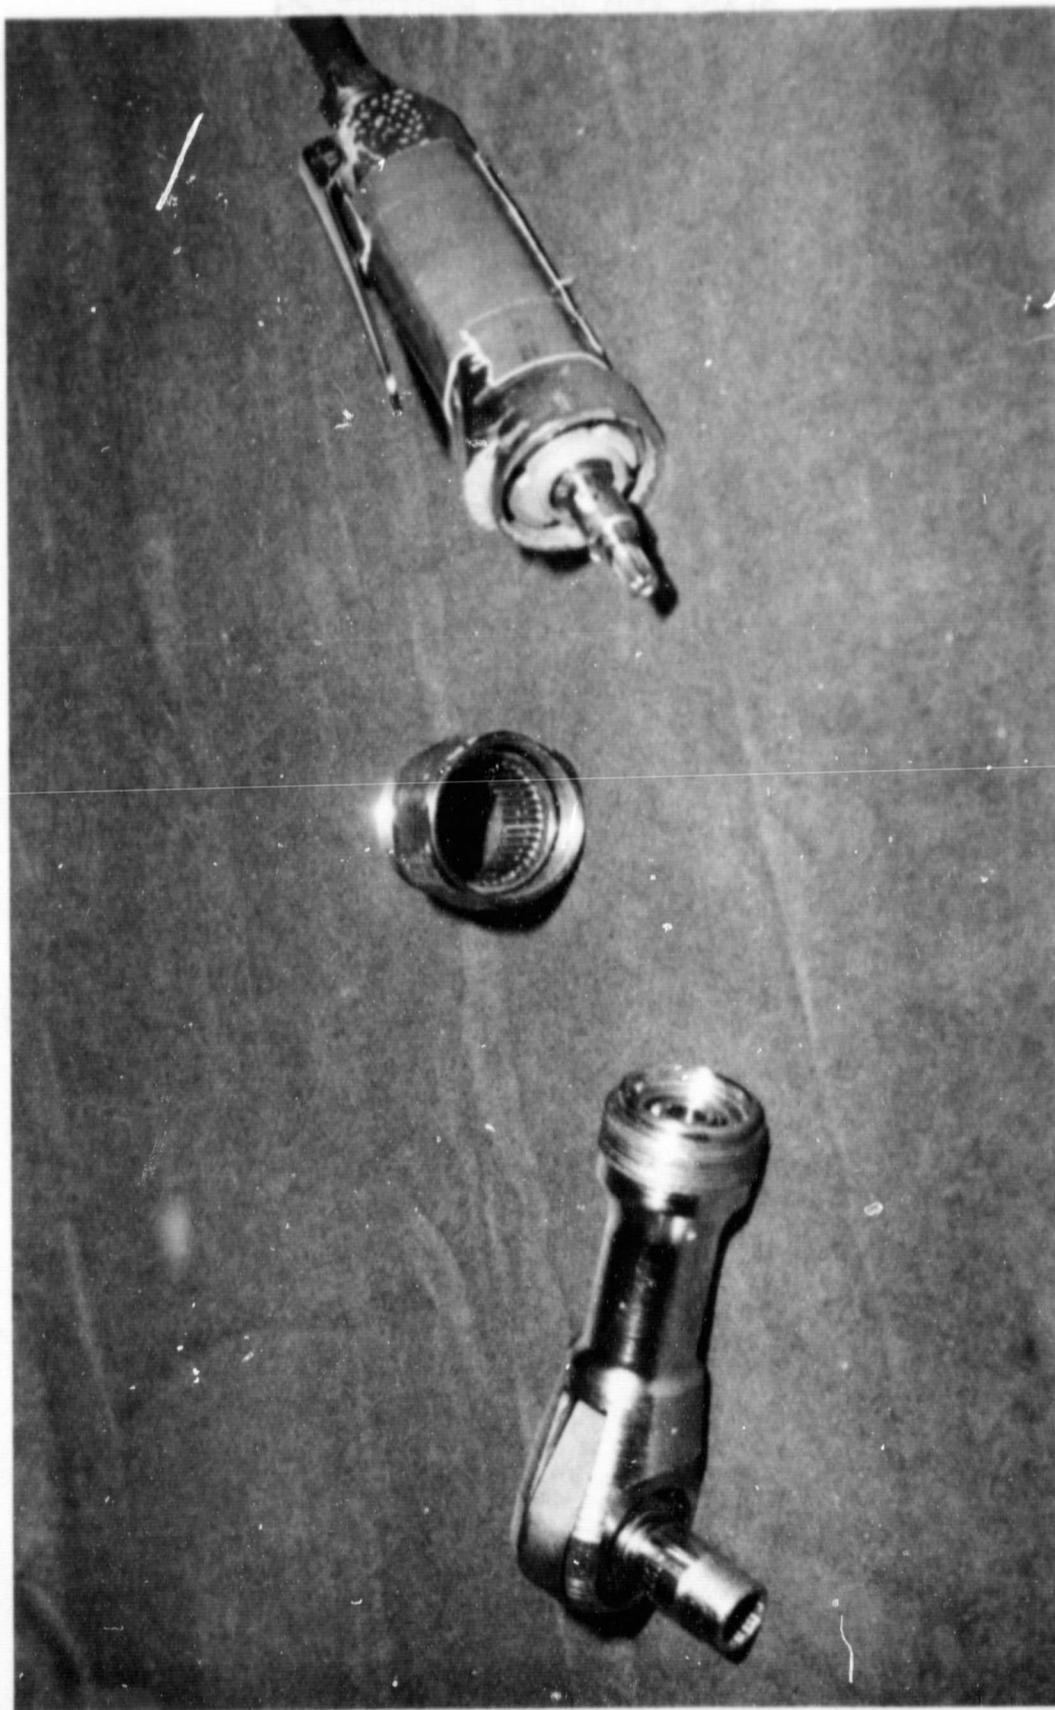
Power ratchet tool prototype 1, TRW globe motor.
